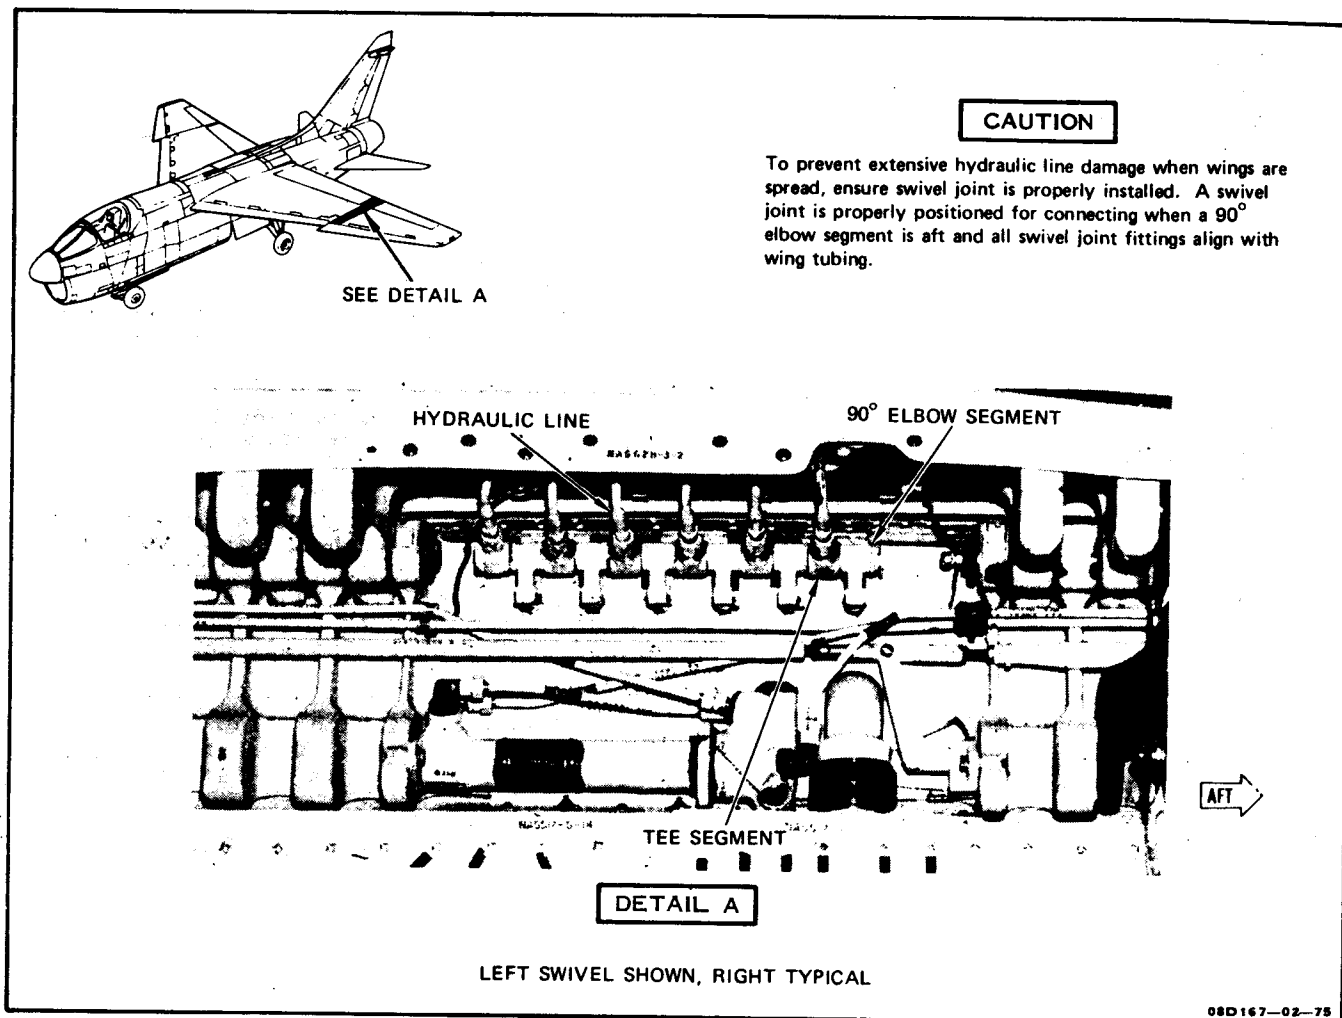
Wingfold Swivel Joint Removal and Installation
